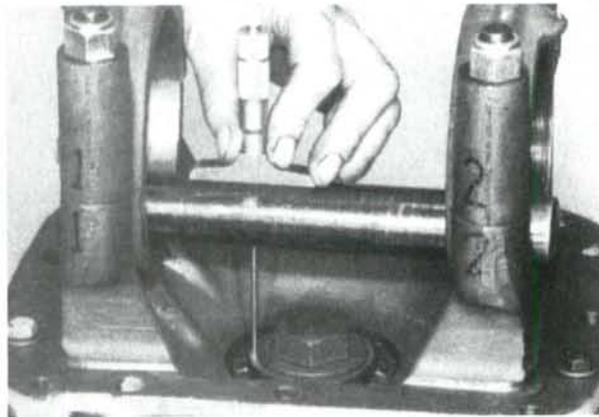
View showing proper depth gage and pilot shaft placement used in determining pinion shaft protrusion.
